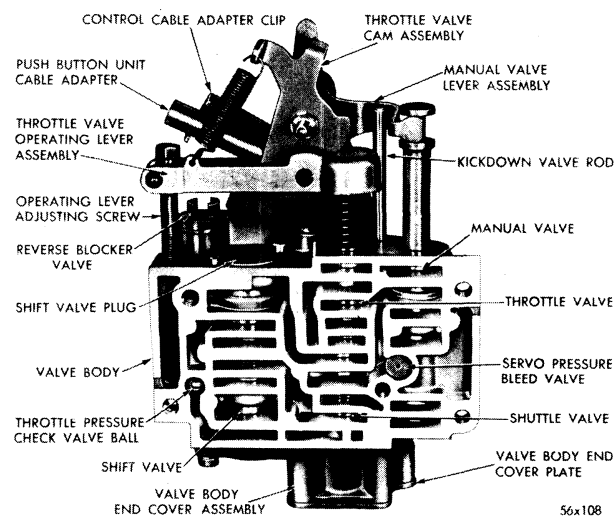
Valve Body Assembly (Valve Body Plate Removed)
